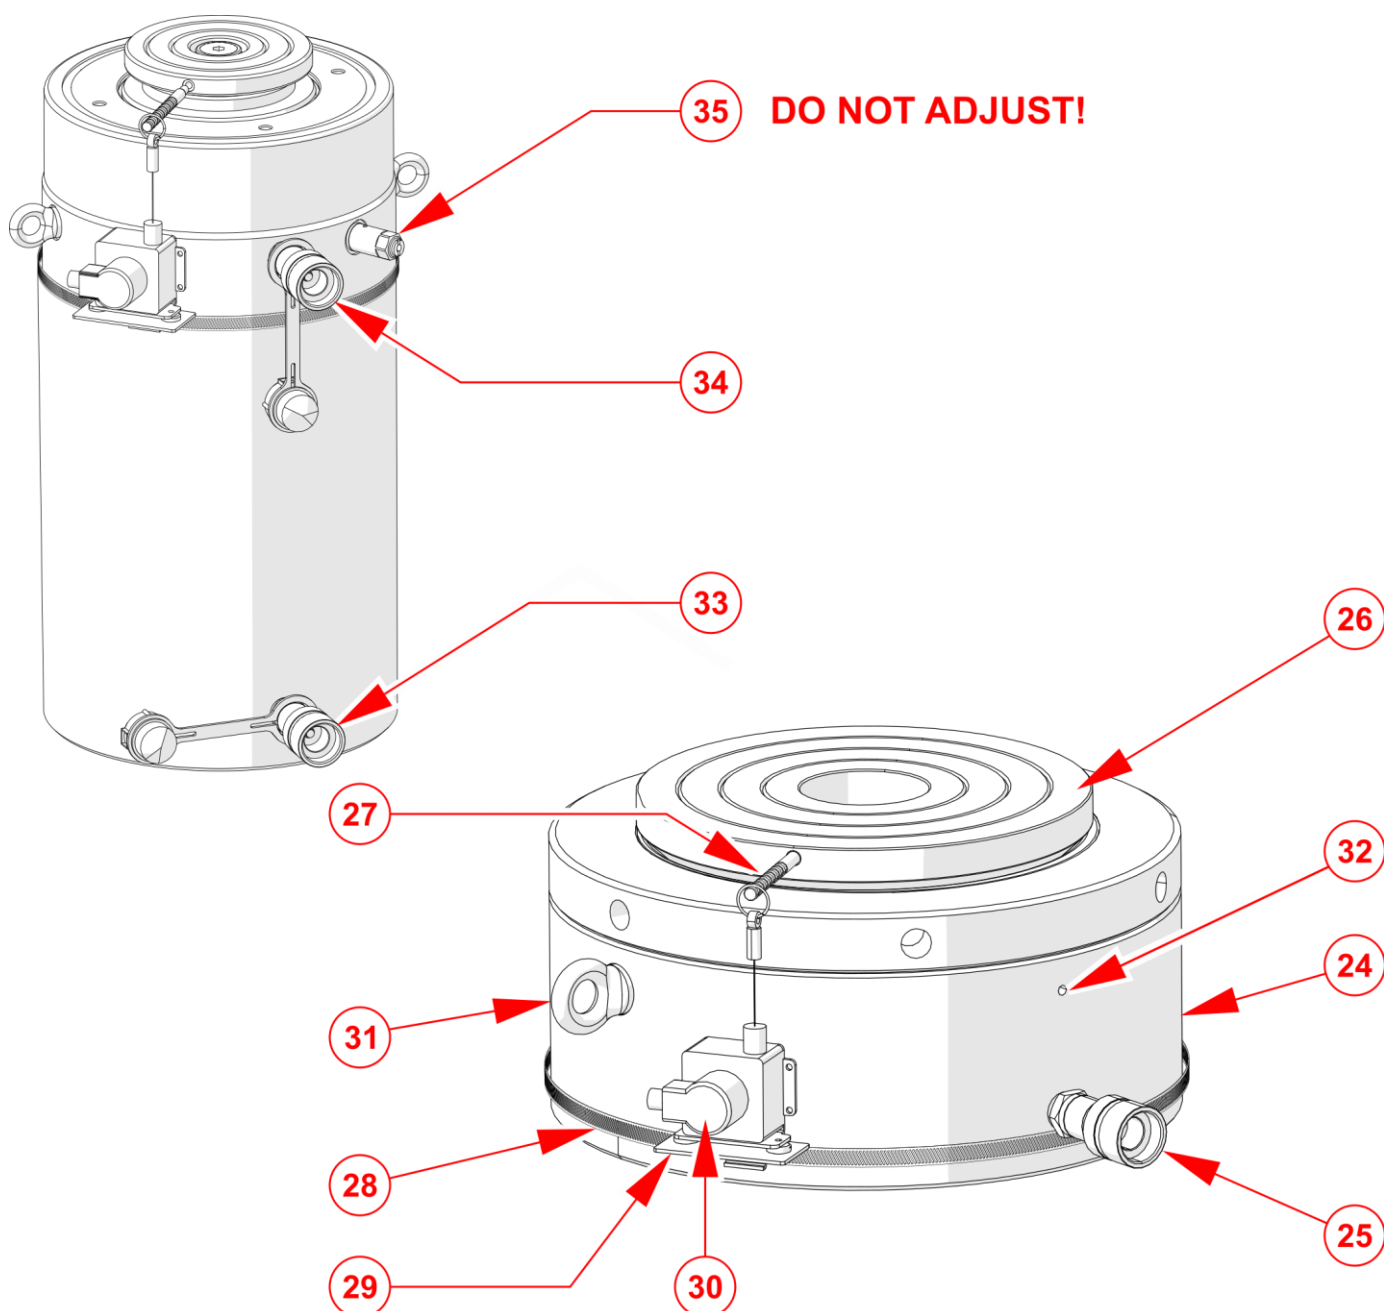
Component Identification - Cylinder & Displacement Sensor
